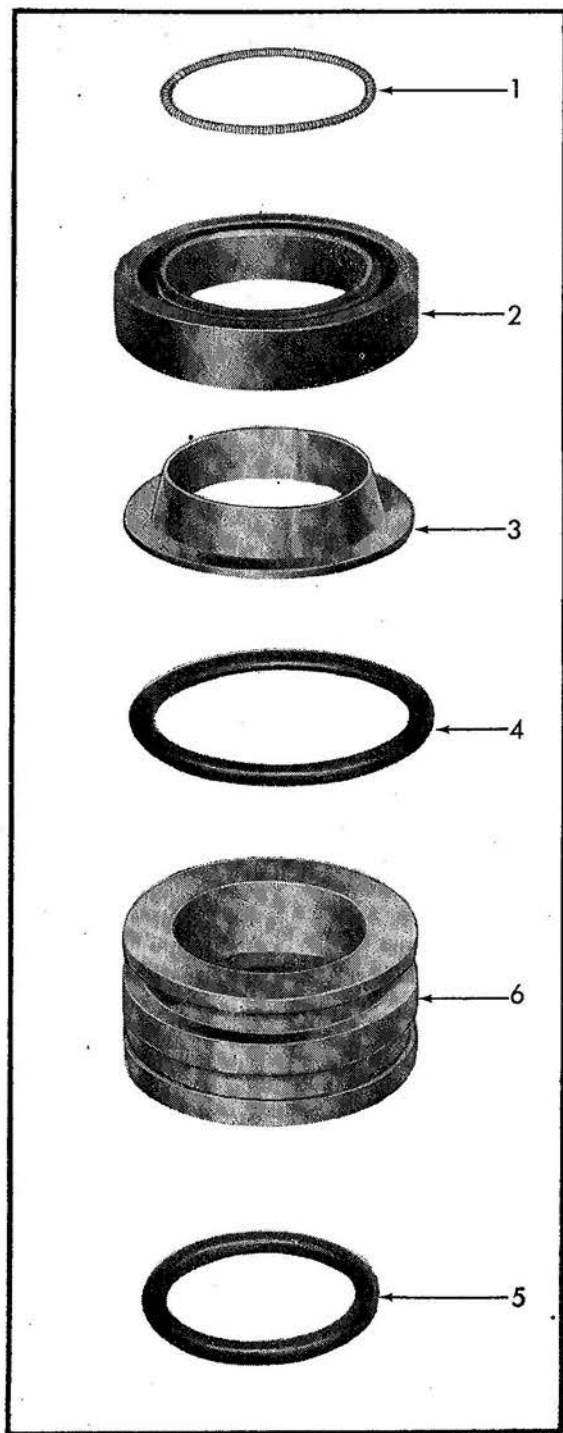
Sequence of Disassembly of Shaft Seal Assembly
